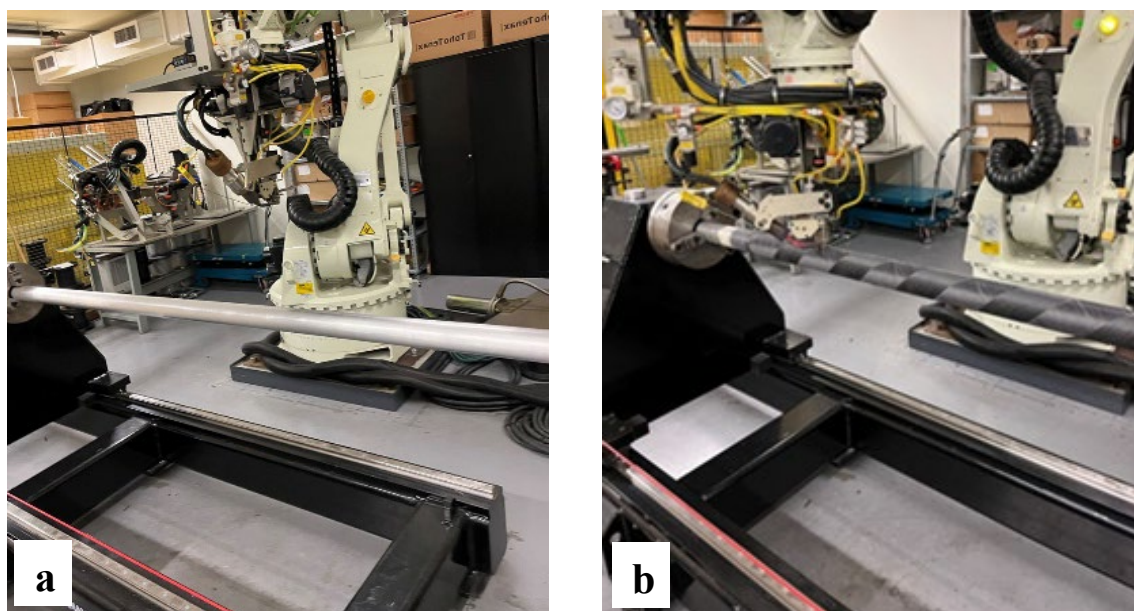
AFP manufacturing of hybrid aluminum/thermoplastic composite tubes: (a) aluminum tube mounted on the AFP system and used as the mandrel; (b) thermoplastic composite tape deposition over the aluminum tube during hybrid tube manufacturing.
